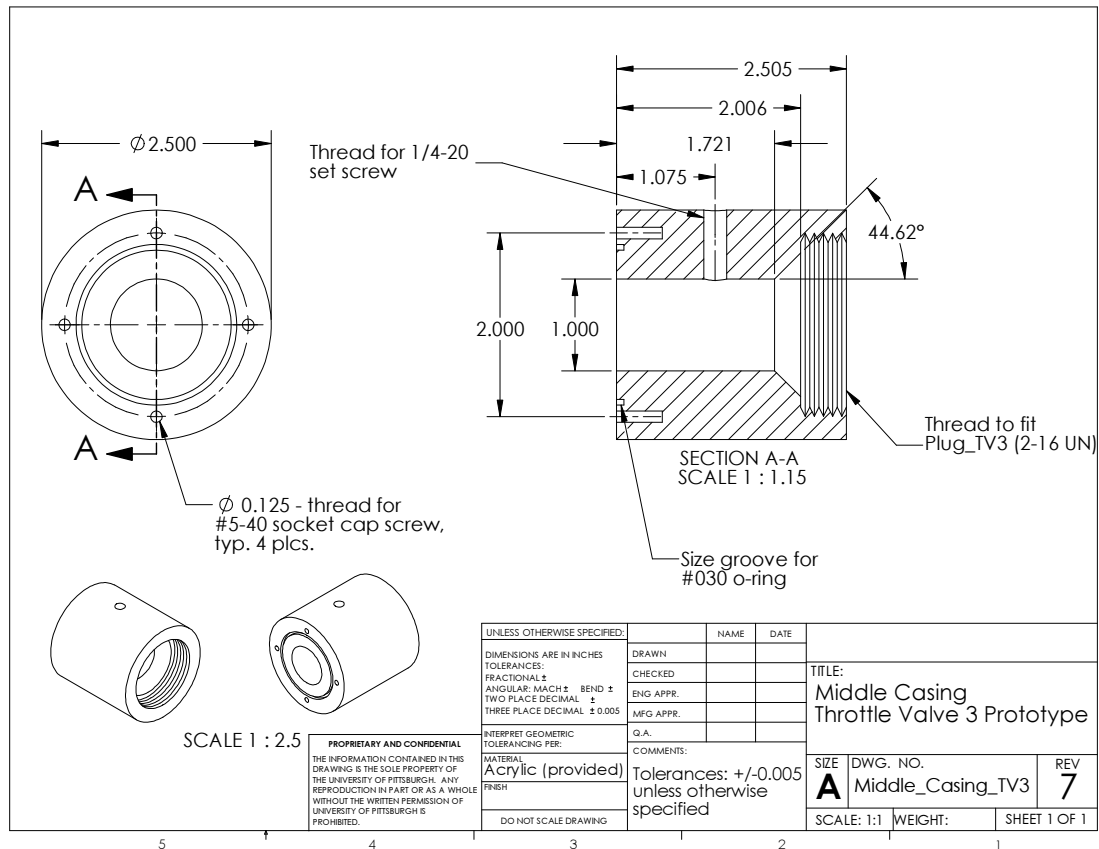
Middle casing component drawing for split-flow plug valve prototype (TV3).
